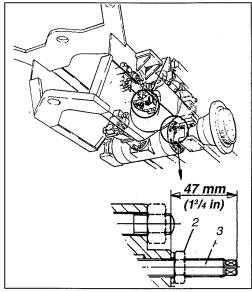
Rear axle 2 Lock nut 3 Adjusting screw
